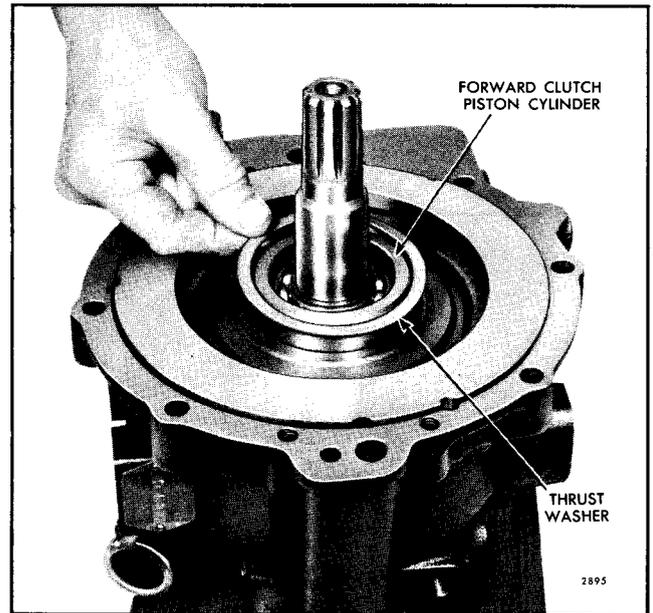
Installing Forward Clutch Piston Cylinder Thrust Washer
